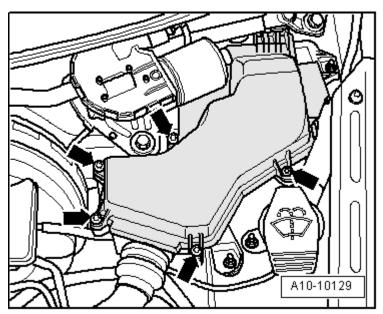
Removing Bracket From Suspension Strut Transverse Beam & Bolts And Suspension Strut Transverse Beam
